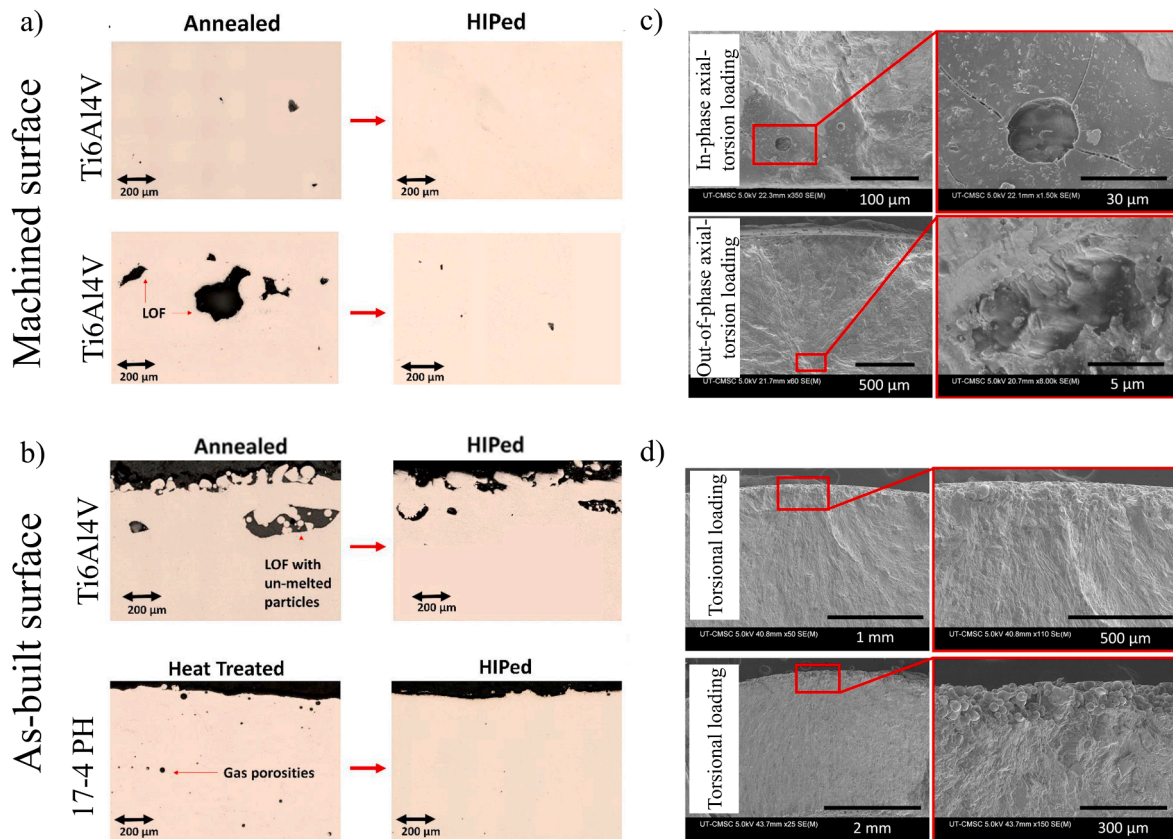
Defect morphologies representative of AM metals subjected to post-processing heat treatments under a) machined and b) as-built surface conditions; c) fatigue crack initiation sites from internal defects for AM machined surface HIPed specimens; d) fatigue crack initiation sites from the external surface for AM as-built surface HIPed specimens. Figure adapted from [169,188].
